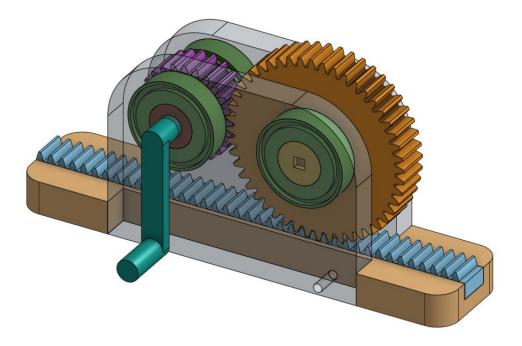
Experiment 3 Rack and Pinion Assembly for Design Review
